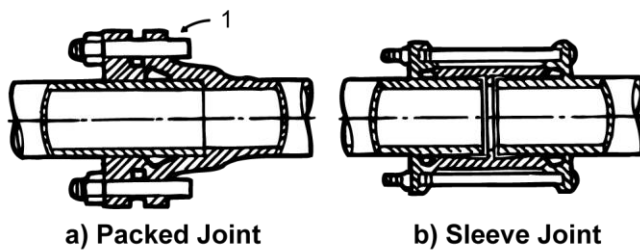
Cross Sections of Typical Packed and Sleeve Joints
